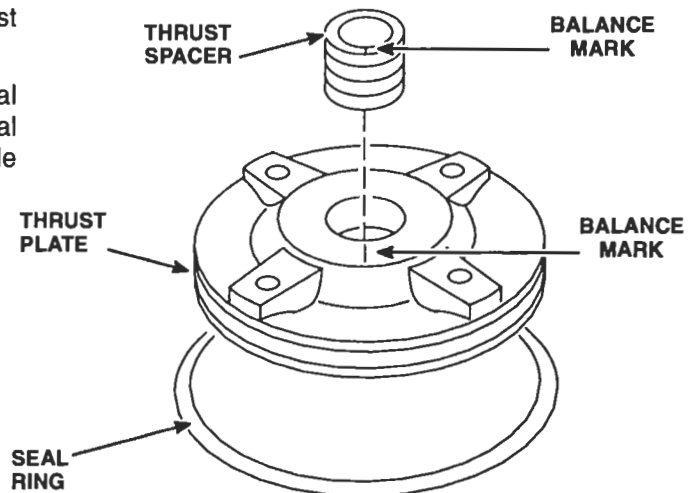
Installing Thrust Spacer in Center Housing Thrust Plate
